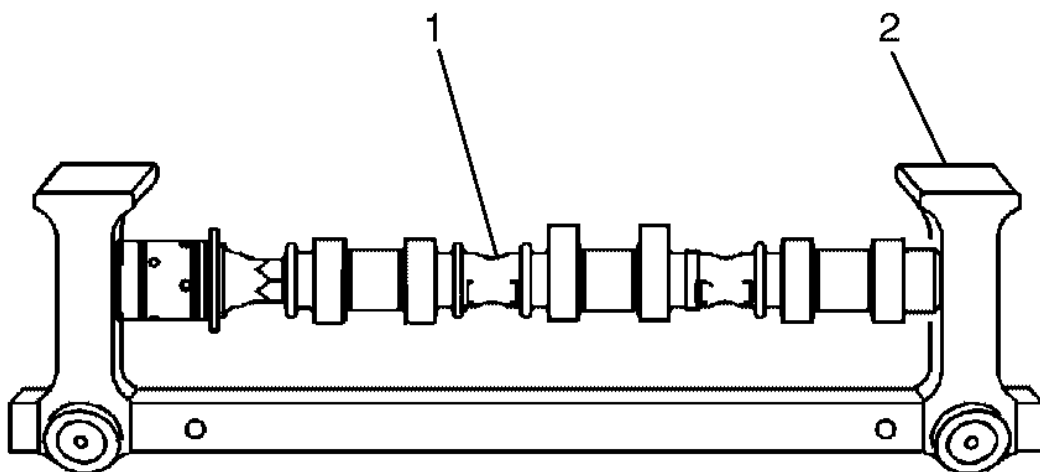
Identifying Camshaft Inspection Points
